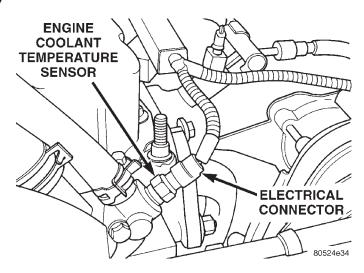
Engine Coolant Temperature Sensor—4.0L Engine
